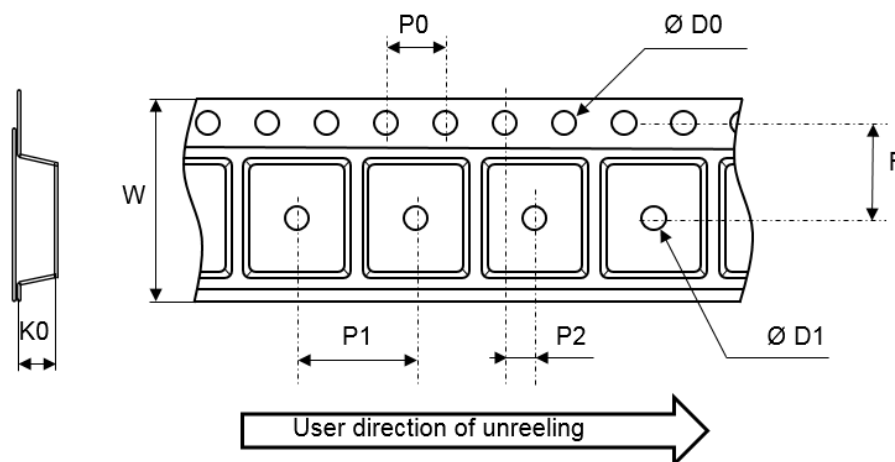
Tape and reel orientationFigure 16: 13" reel dimensions (mm)Figure 17: Inner box dimensions (mm)
